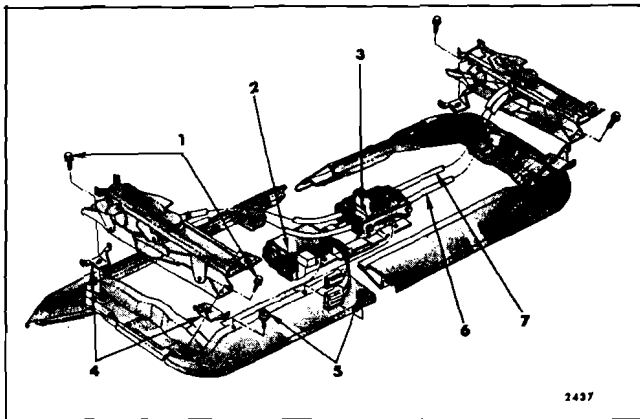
Front Seat Adjuster, Motor and Transmission - "A" Styles - Four-Way Adjusters
